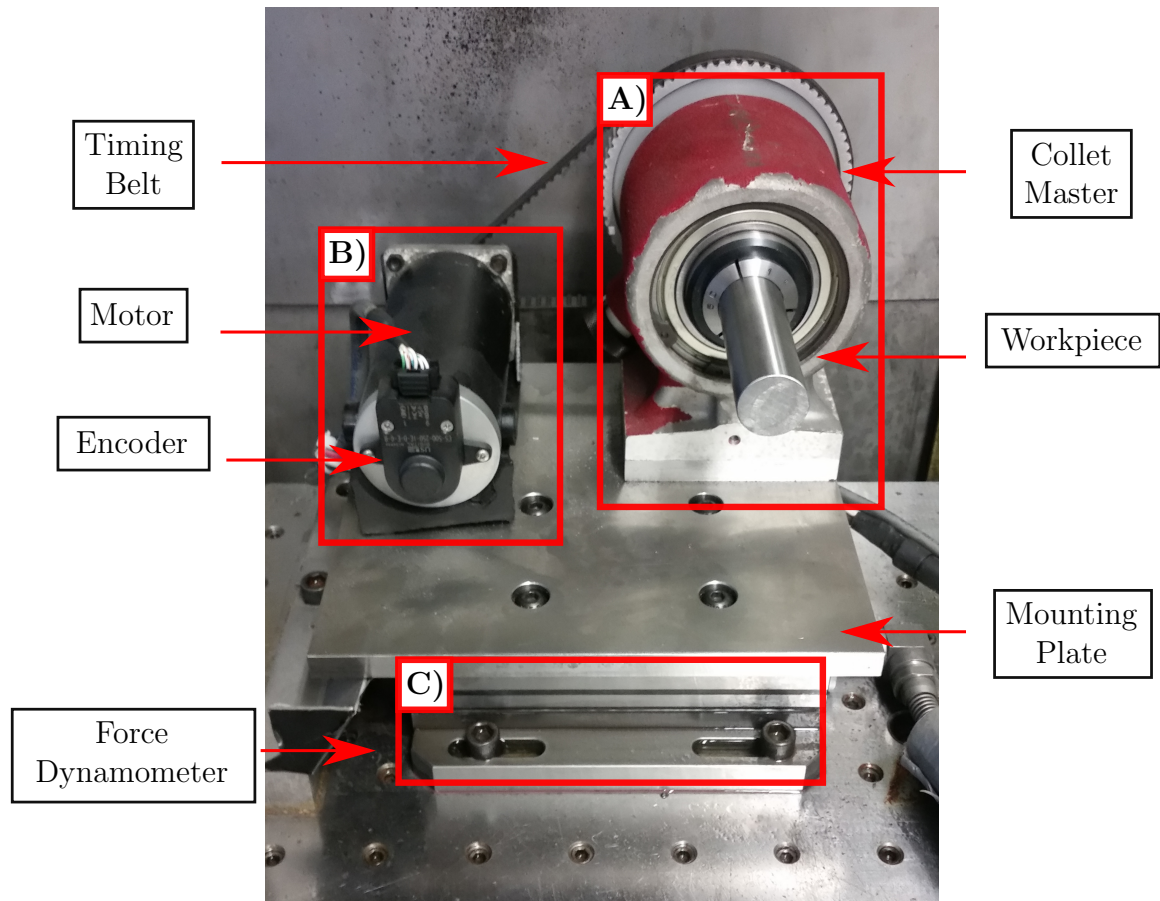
The inside of the rotary axis showing; A) the Collet Master with timing belt, B) the motor and encoder, and C) the force dynamometer
